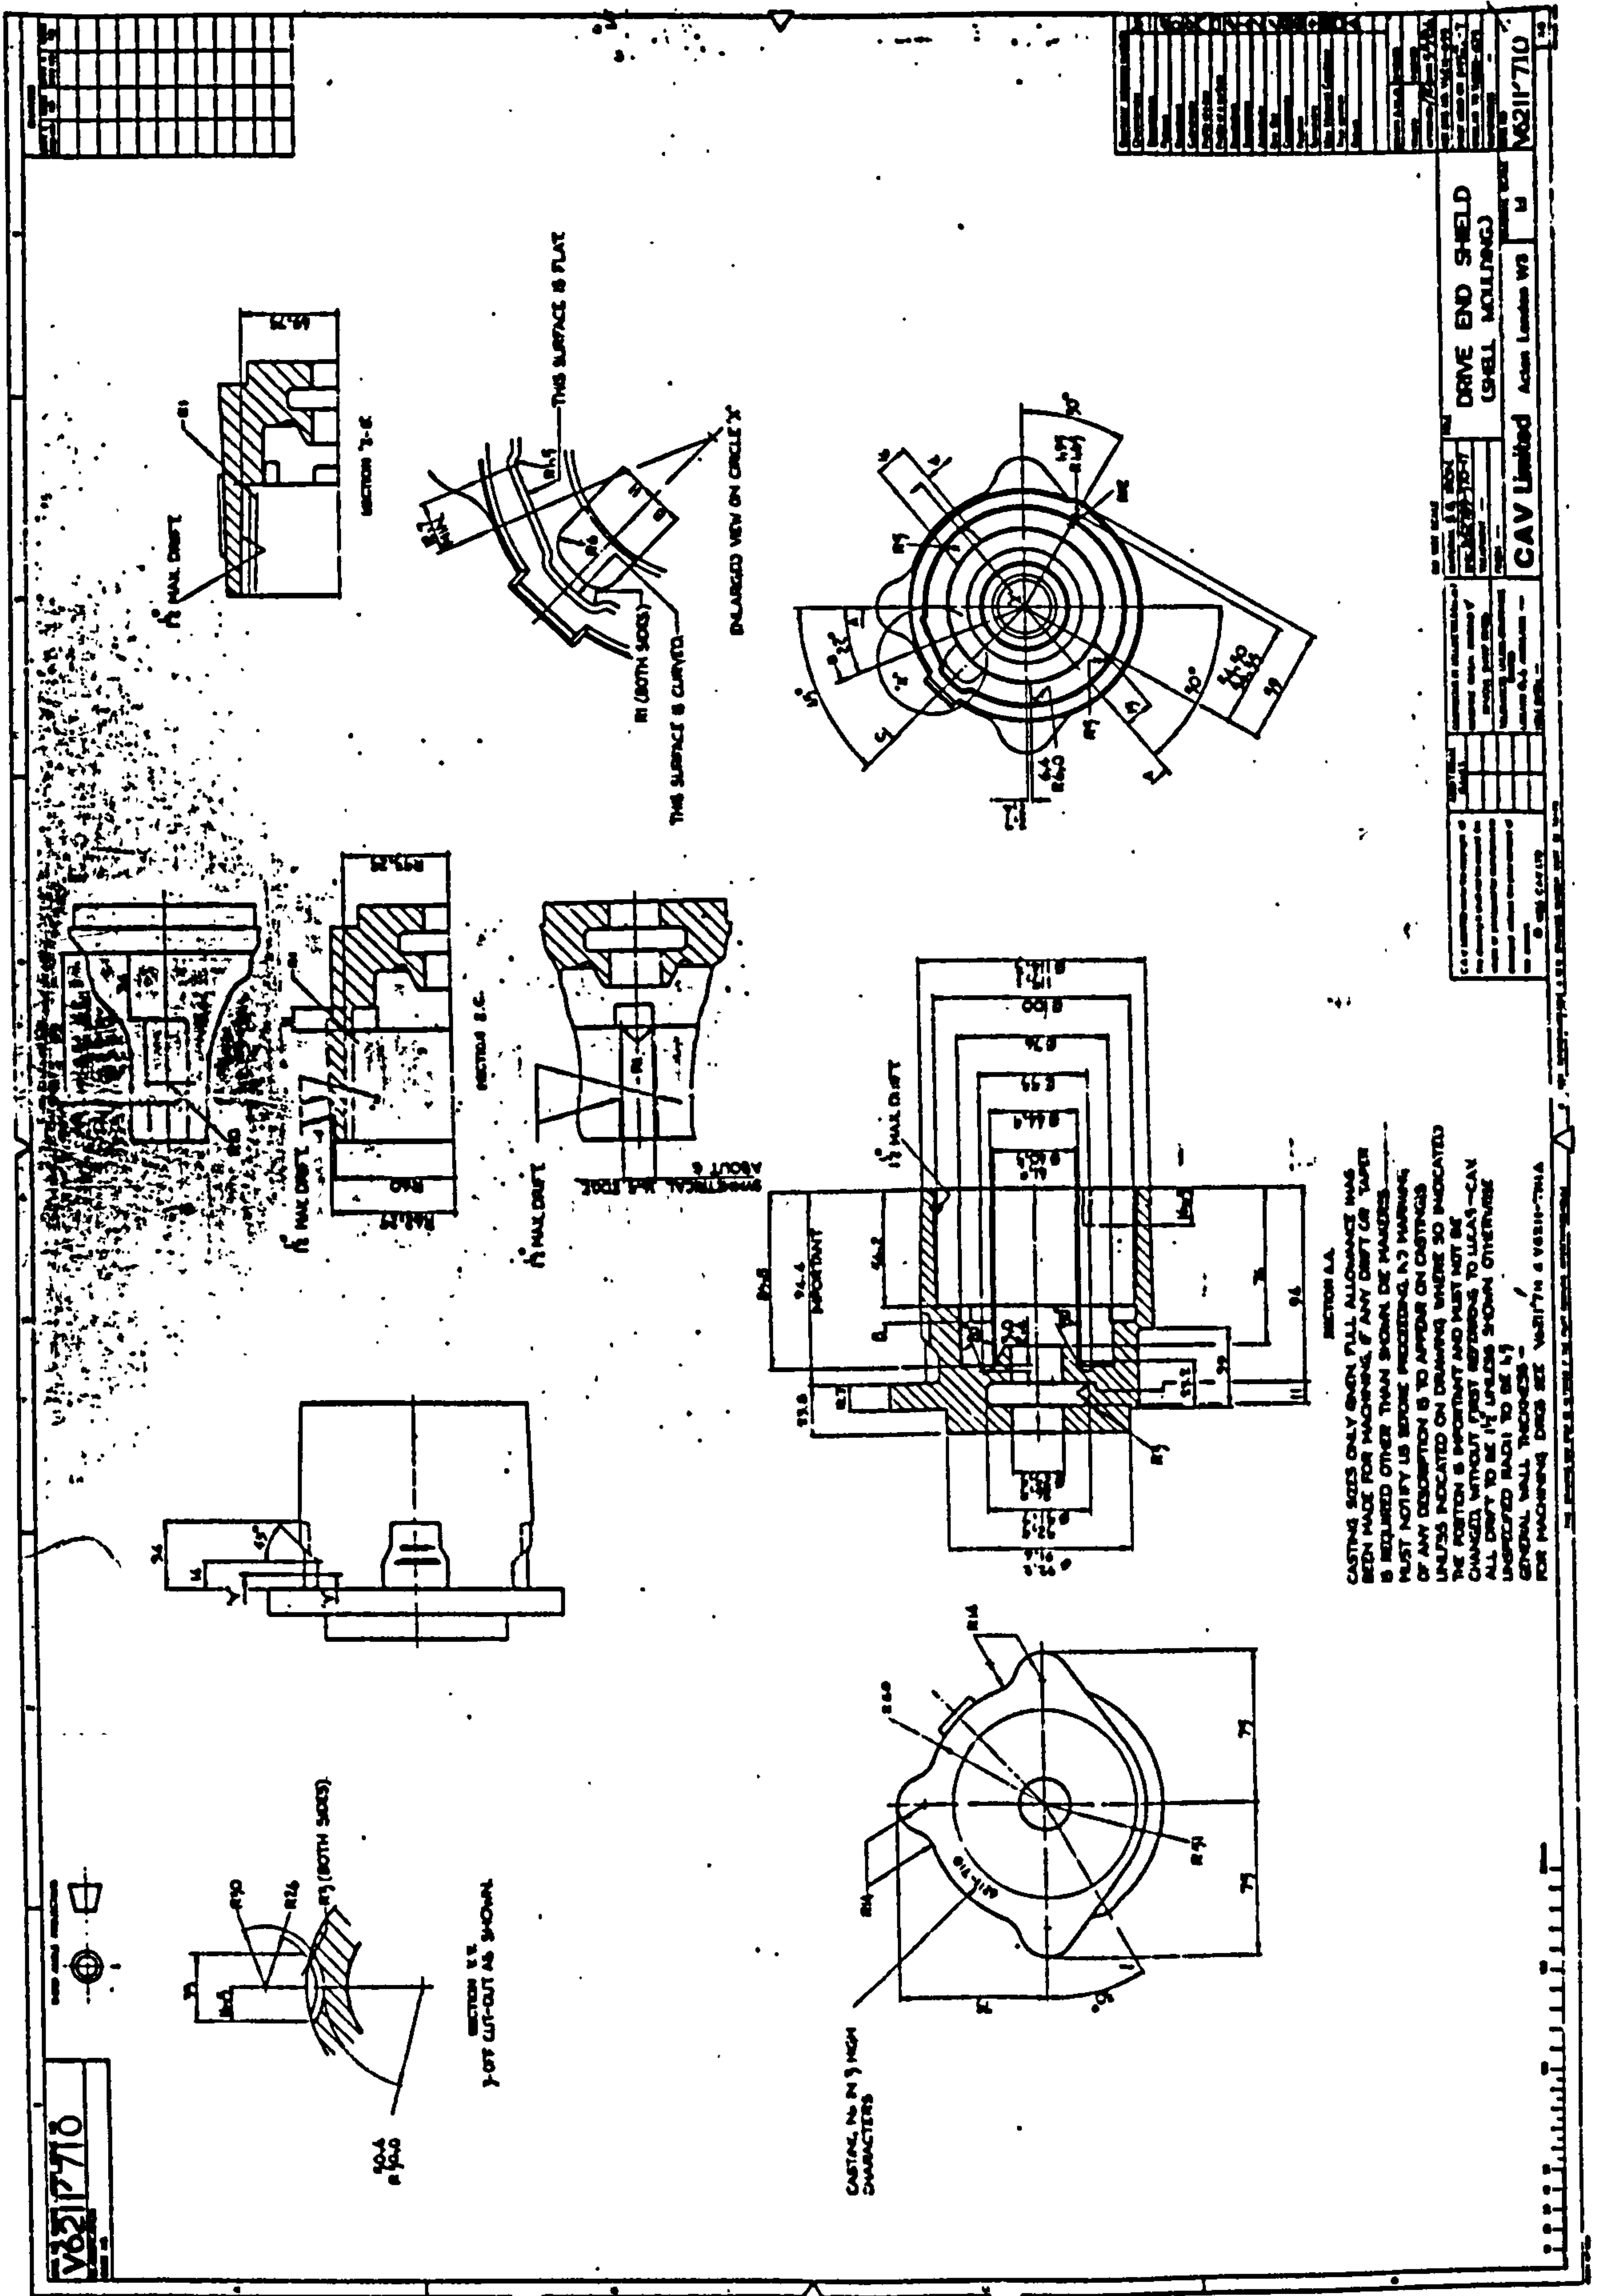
Manufacturing Drawing for a Drive-End-Shield Casting Variant (Lucas-CAV)
